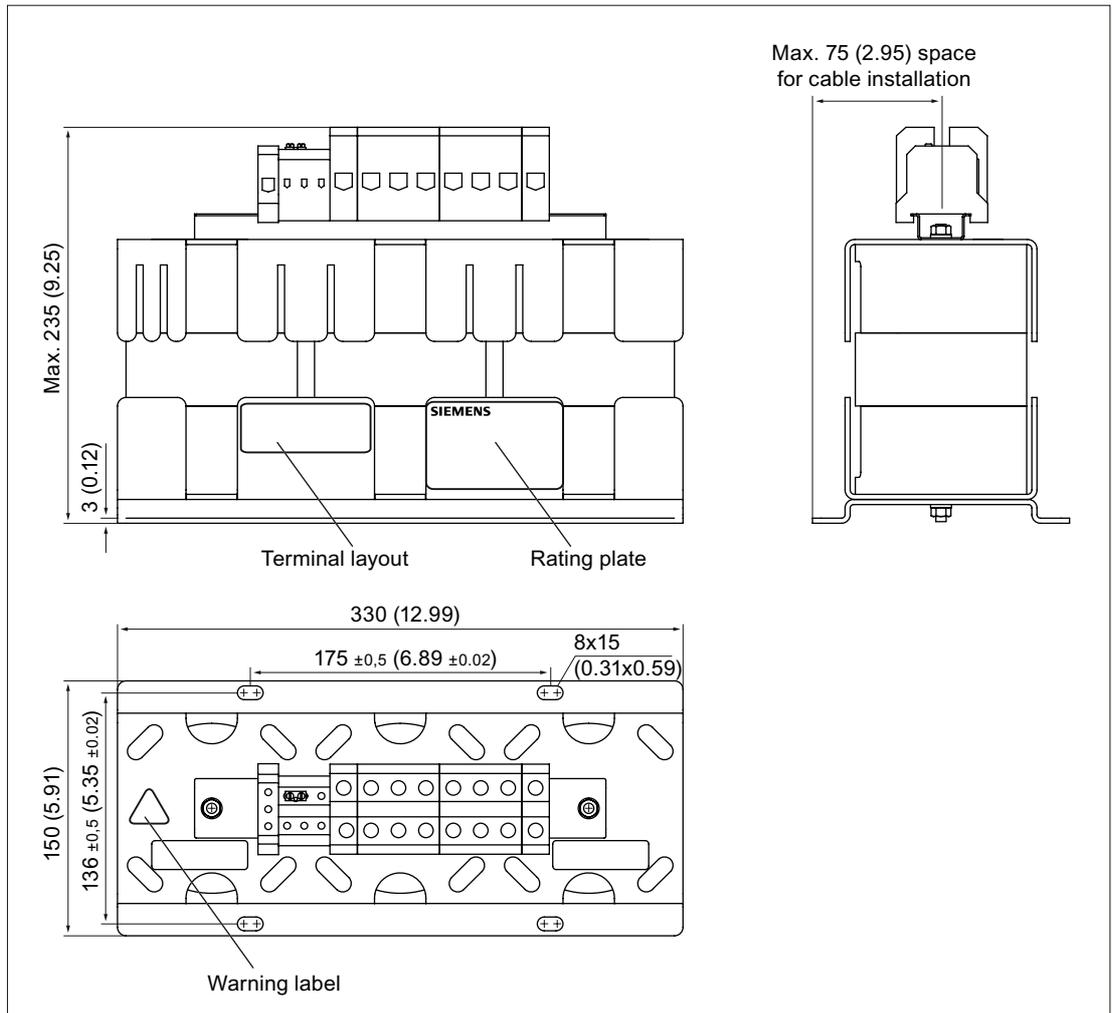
Dimension drawing of HFD line reactor 36 kW, all dimensions in mm and (inches)
